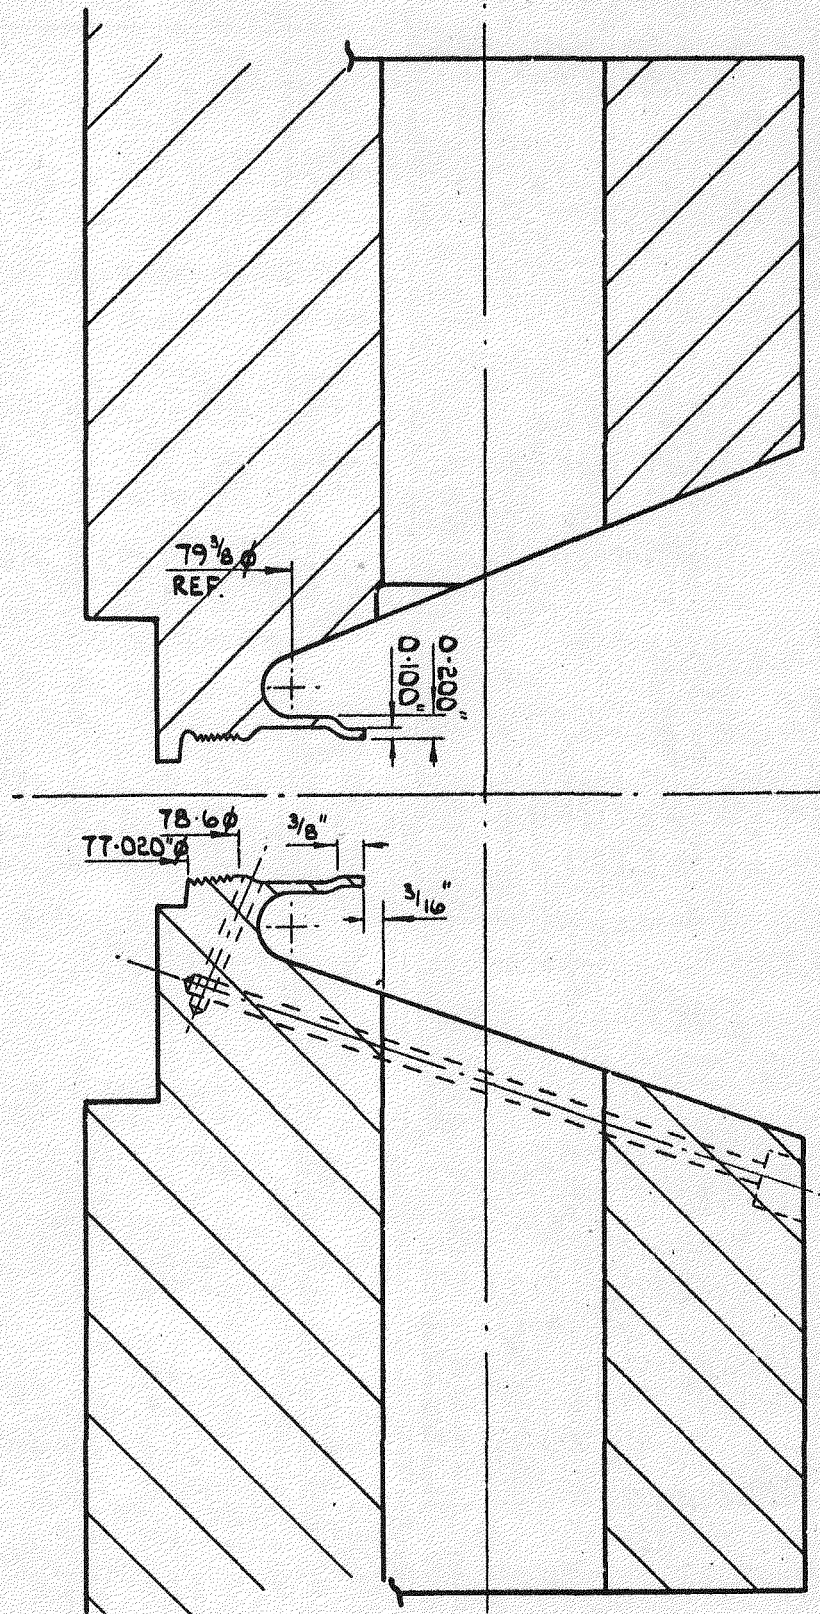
DRAGON TYPE SEAL FEATURE ON MAIN FLANGE.
